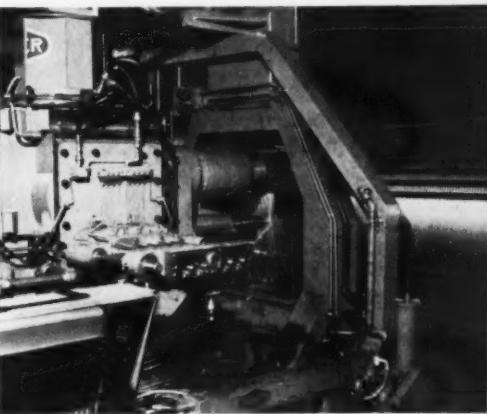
Drilling, reaming, milling as many as 2700 holes in rotors up to 90 tons and 24 feet long for large steam turbine-generators is the task of this tape-controlled Baker Brothers machine. Holes can be drilled singly, as shown in this view, or five at a time.
